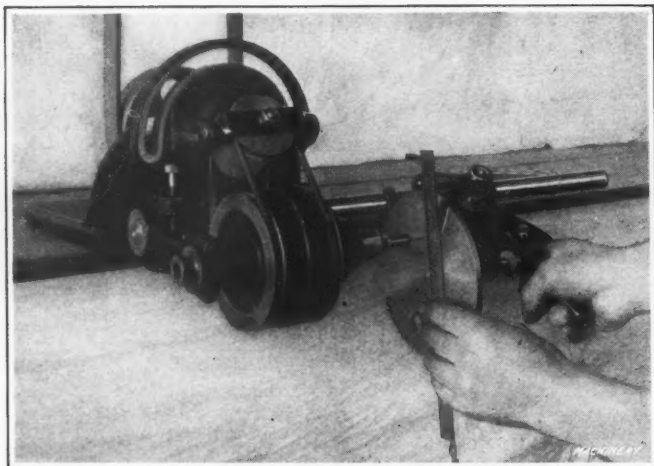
Lowenstein Universal Tapping Machine with Spindle in Horizontal Position
